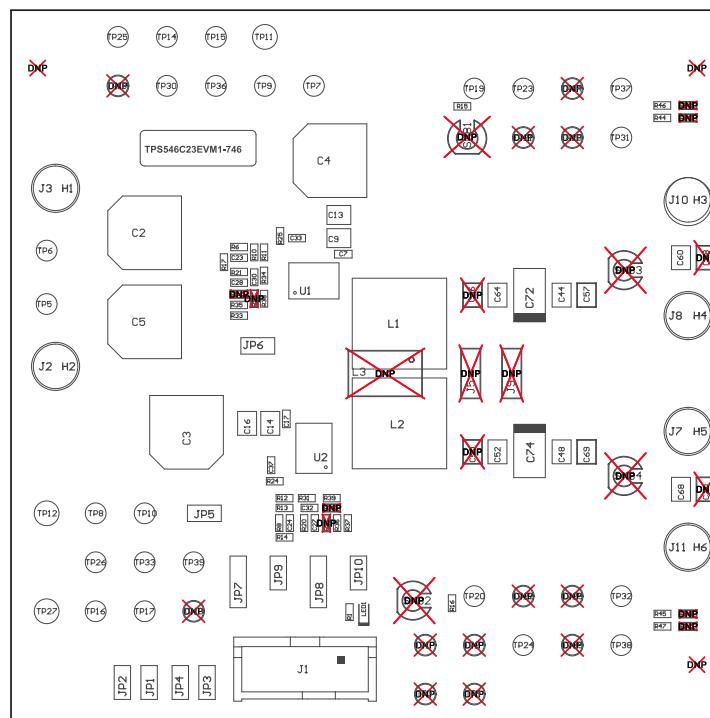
TPS546C23EVM1-746 EVM Top Layer Assembly Drawing (Top View)
